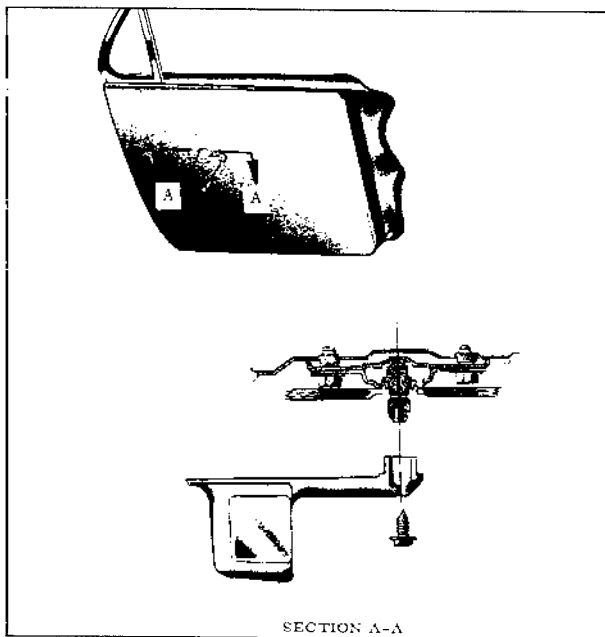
Door Inside Remote Control "Paddle" Handles
